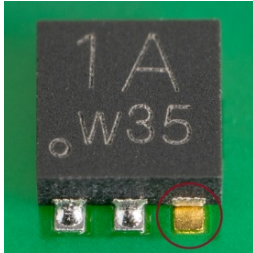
DFN2020MD-6 (SOT1220) with tin-plated wettable side pads (7-D160): Solder paste printing with fails
